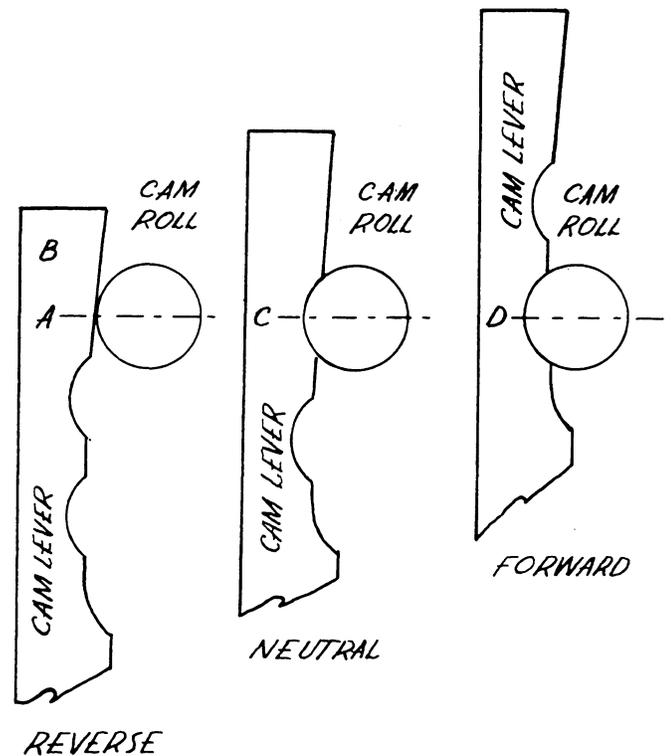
Reverse Gear - Cam Adjustment - Joes Model
